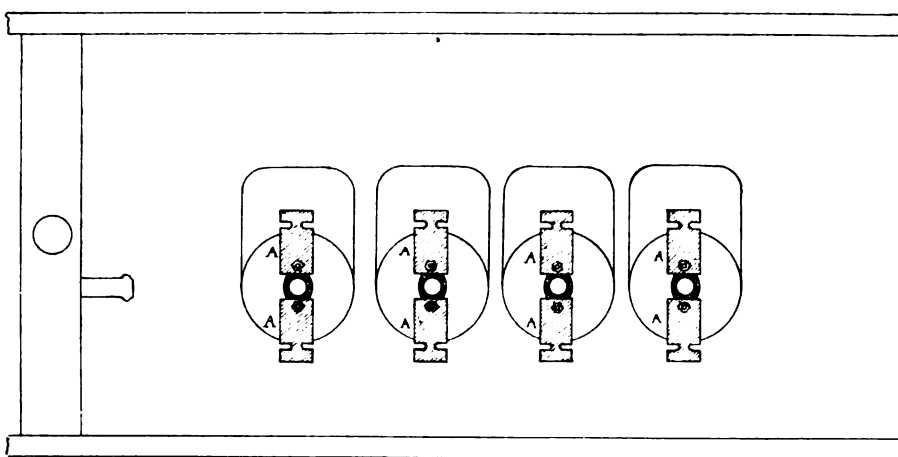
This shows the first steps employed in making use of a combination template for manifold work. The individual plates, A, are first clamped securely to the water jackets. The plates are made from pieces of steel plate
